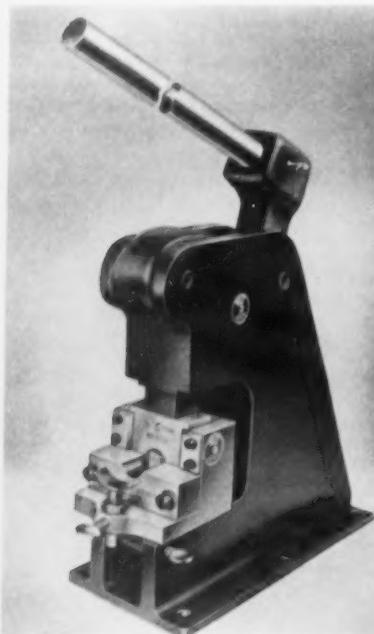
This hand notcher notches one side of tube; the tube is rotated 180 degrees and operation repeated on other side of the tube.
